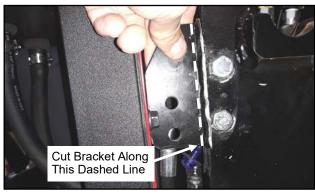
(Cut Welded Loader Bracket)
